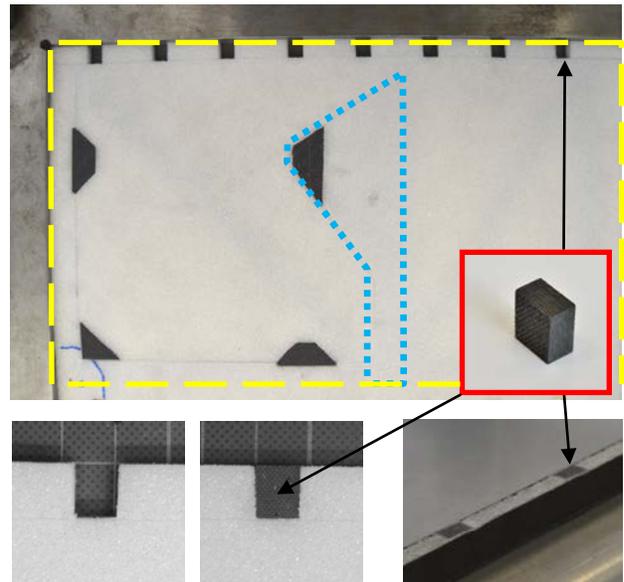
Foam core of the +X Side Wall. The blue marked area indicates how the face sheet shown in Figure 3 will be placed. The details show an exemplary radiator insert (in-plane type) and its placement within the sandwich.
